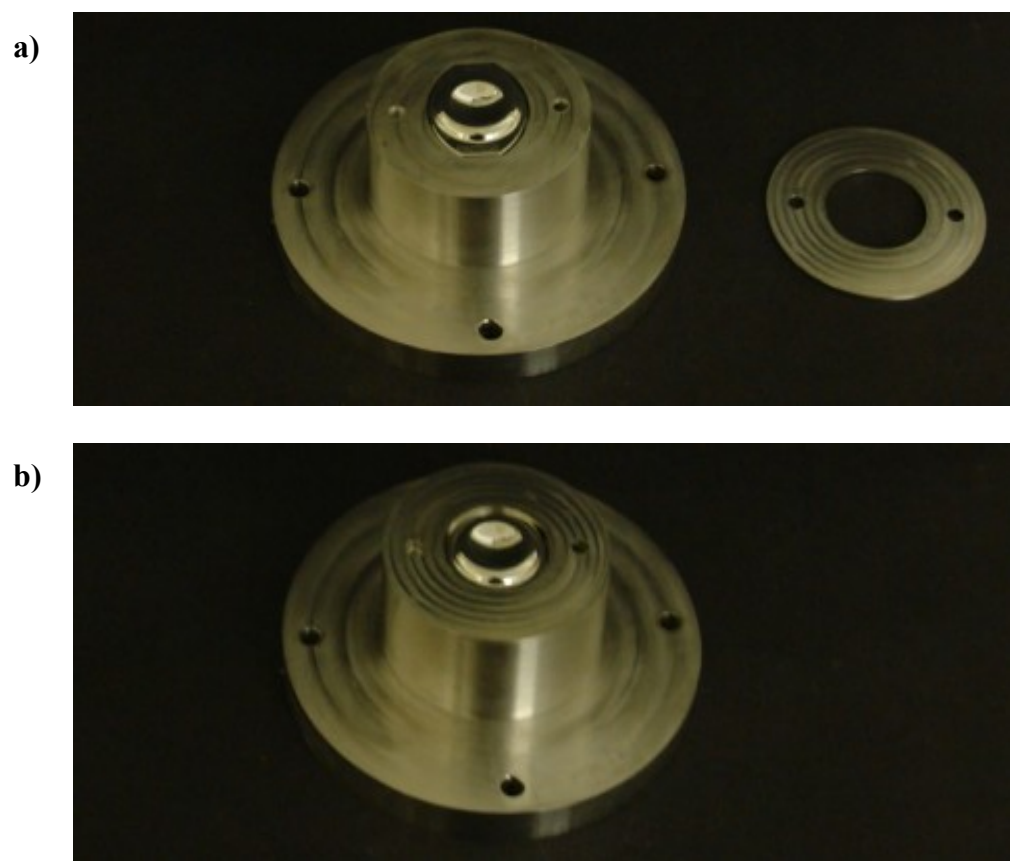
The assembly method of the Charité® endplate to the fixture. a) The metal endplate is placed into the fixture, and b) the lid is placed on top to secure the endplate in place
